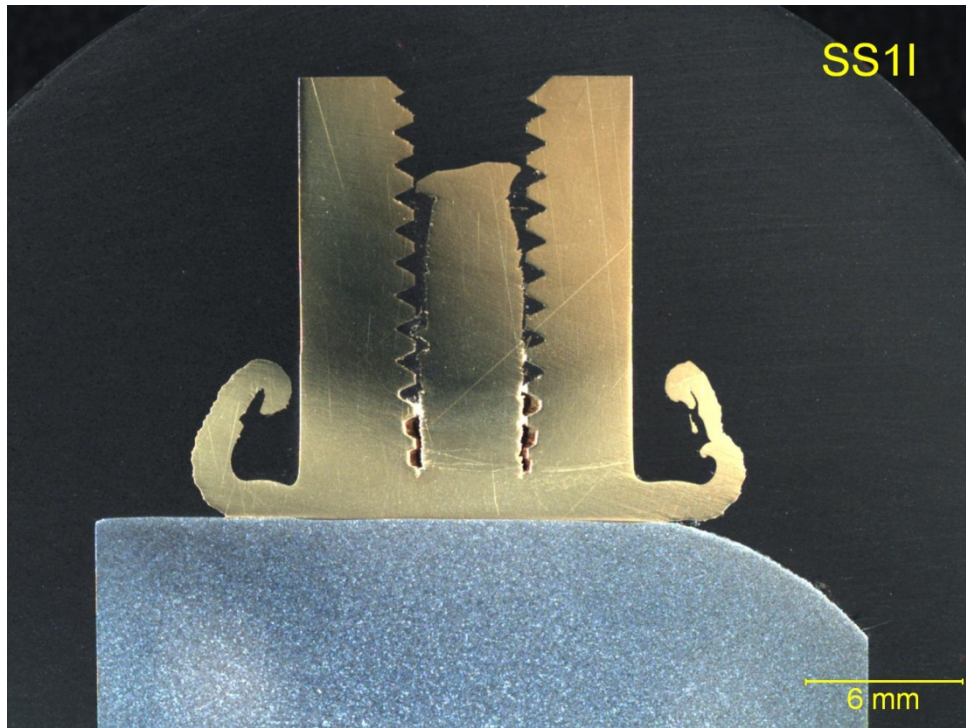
IFW Weld Joint Standard Chemistry Rail #1
